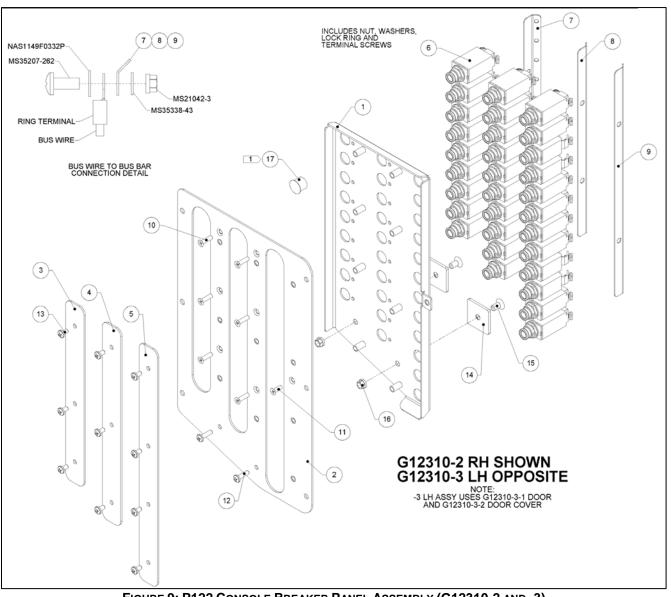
P122 CONSOLE BREAKER PANEL ASSEMBLY (G12310-2 AND -3)
